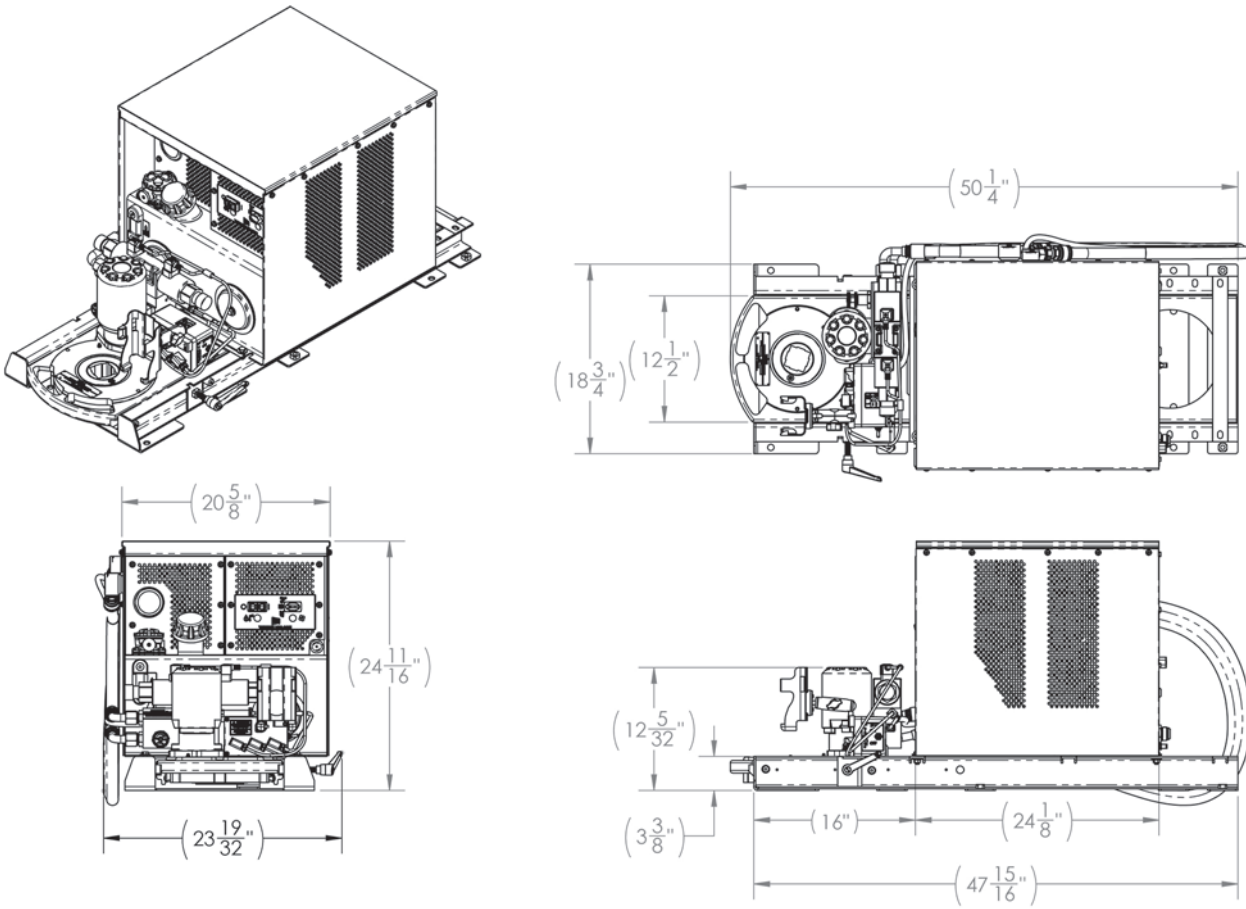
Overall dimensions for TM-7 configuration 17-000-29.
